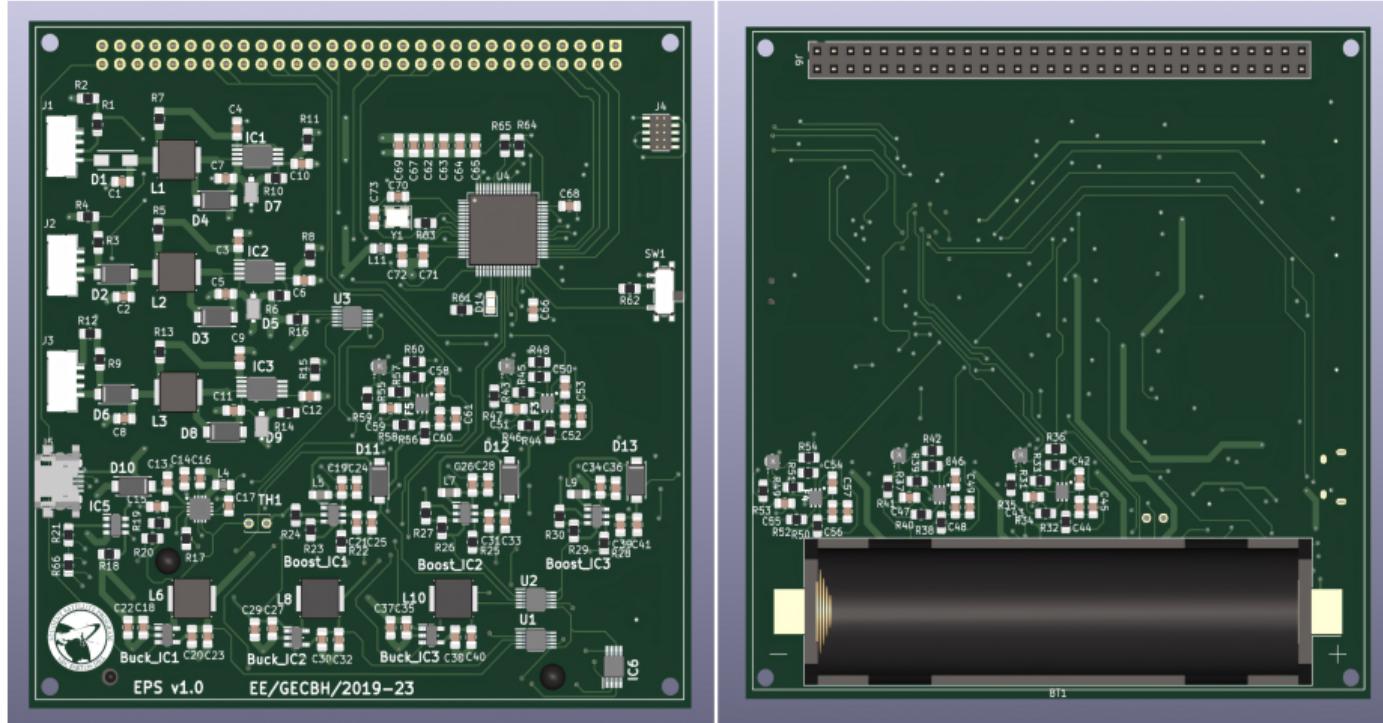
PCB design of EPS (9.5 cm x 9.5 cm)
